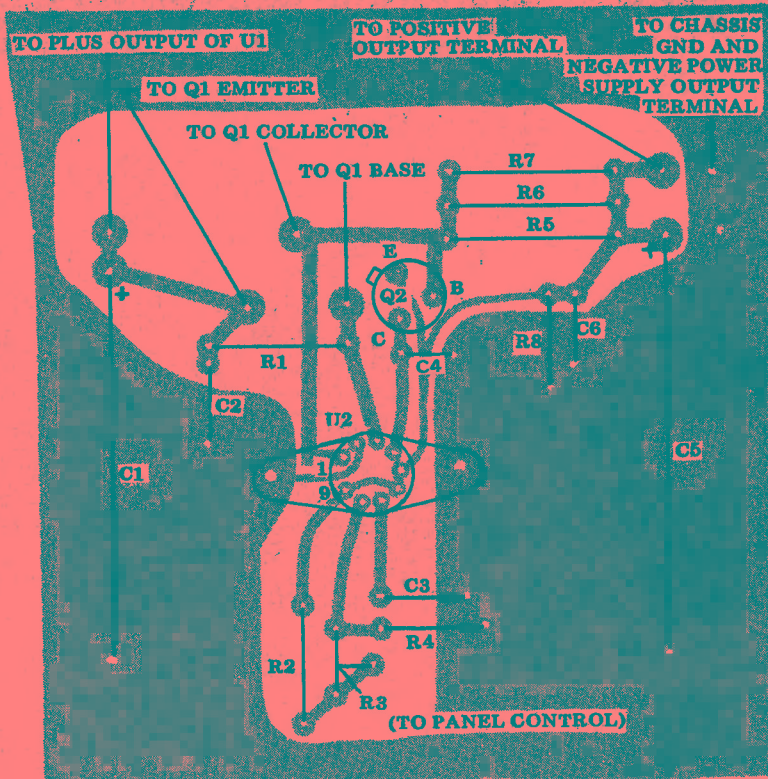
Foil pattern end parts layout for the regulated power supply.
